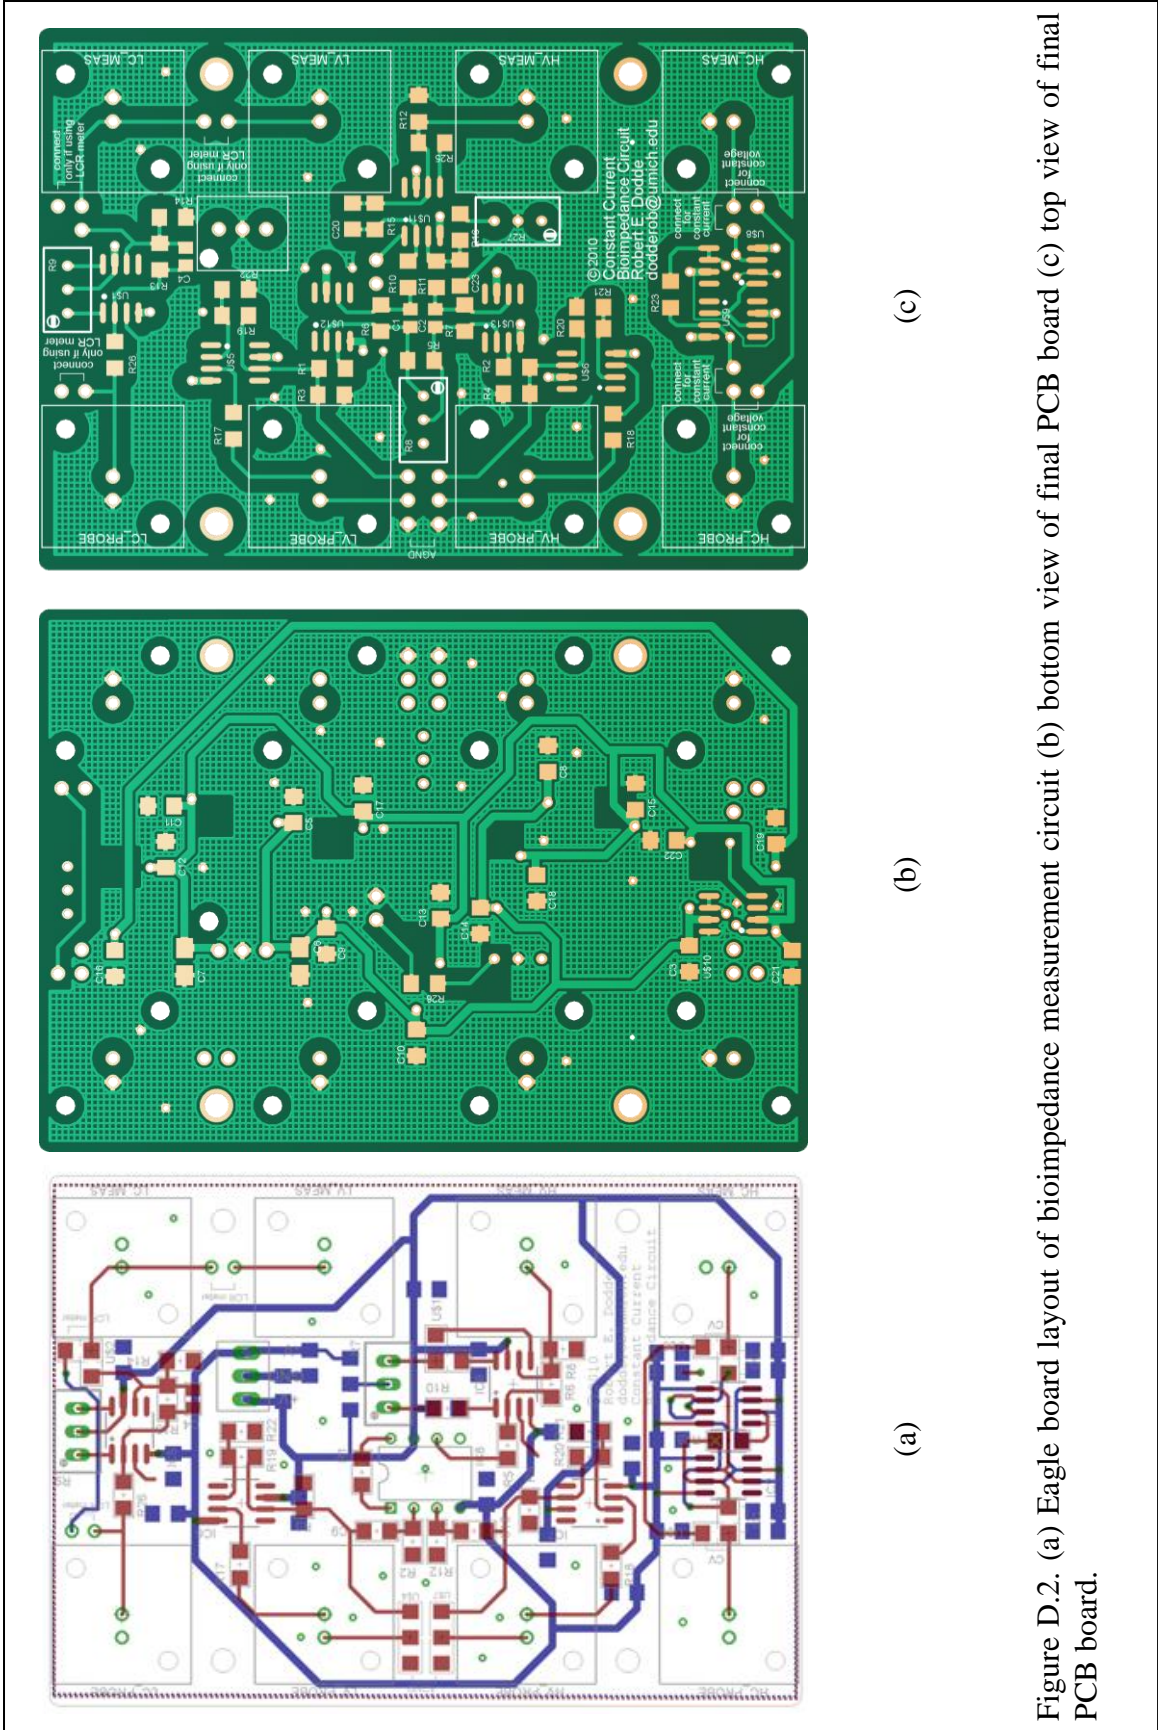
(a) Eagle board layout of bioimpedance measurement circuit (b) bottom view of final PCB board (c) top view of final PCB board.
